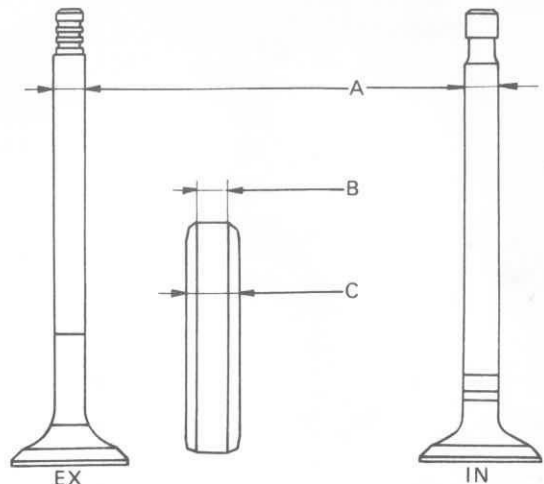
10 Tolerances on standard dimensions for valve stems. Those for valve guides are shown in the centre
